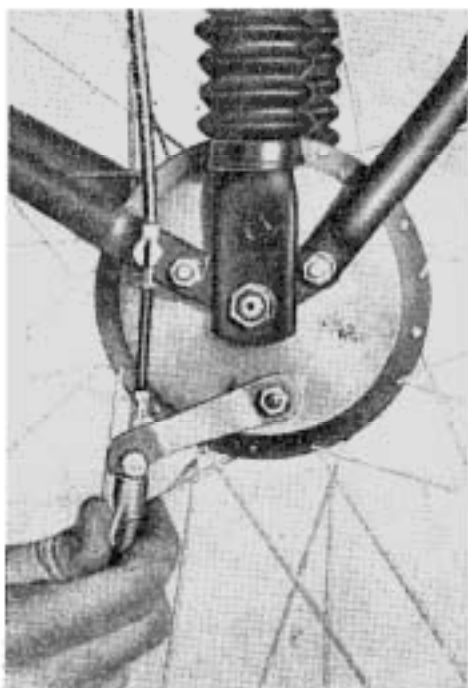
Adjusting the front brake. Fig. 16. — Adjusting the rear brake.
